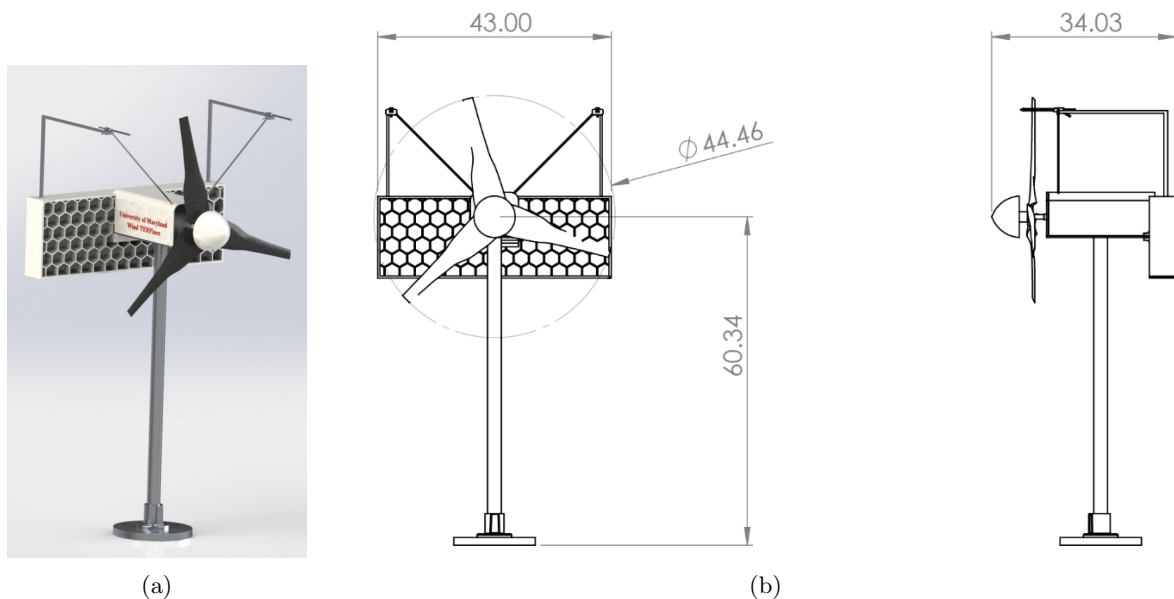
(a) 3D render of the tower assembly; (b) 2D render of the tower assembly
